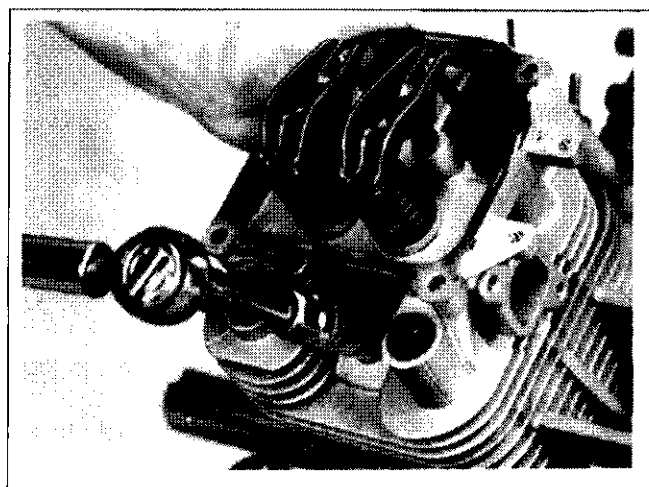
Using Spanner Wrench to Lift Rocker Arm Over Push Rod Ball.
